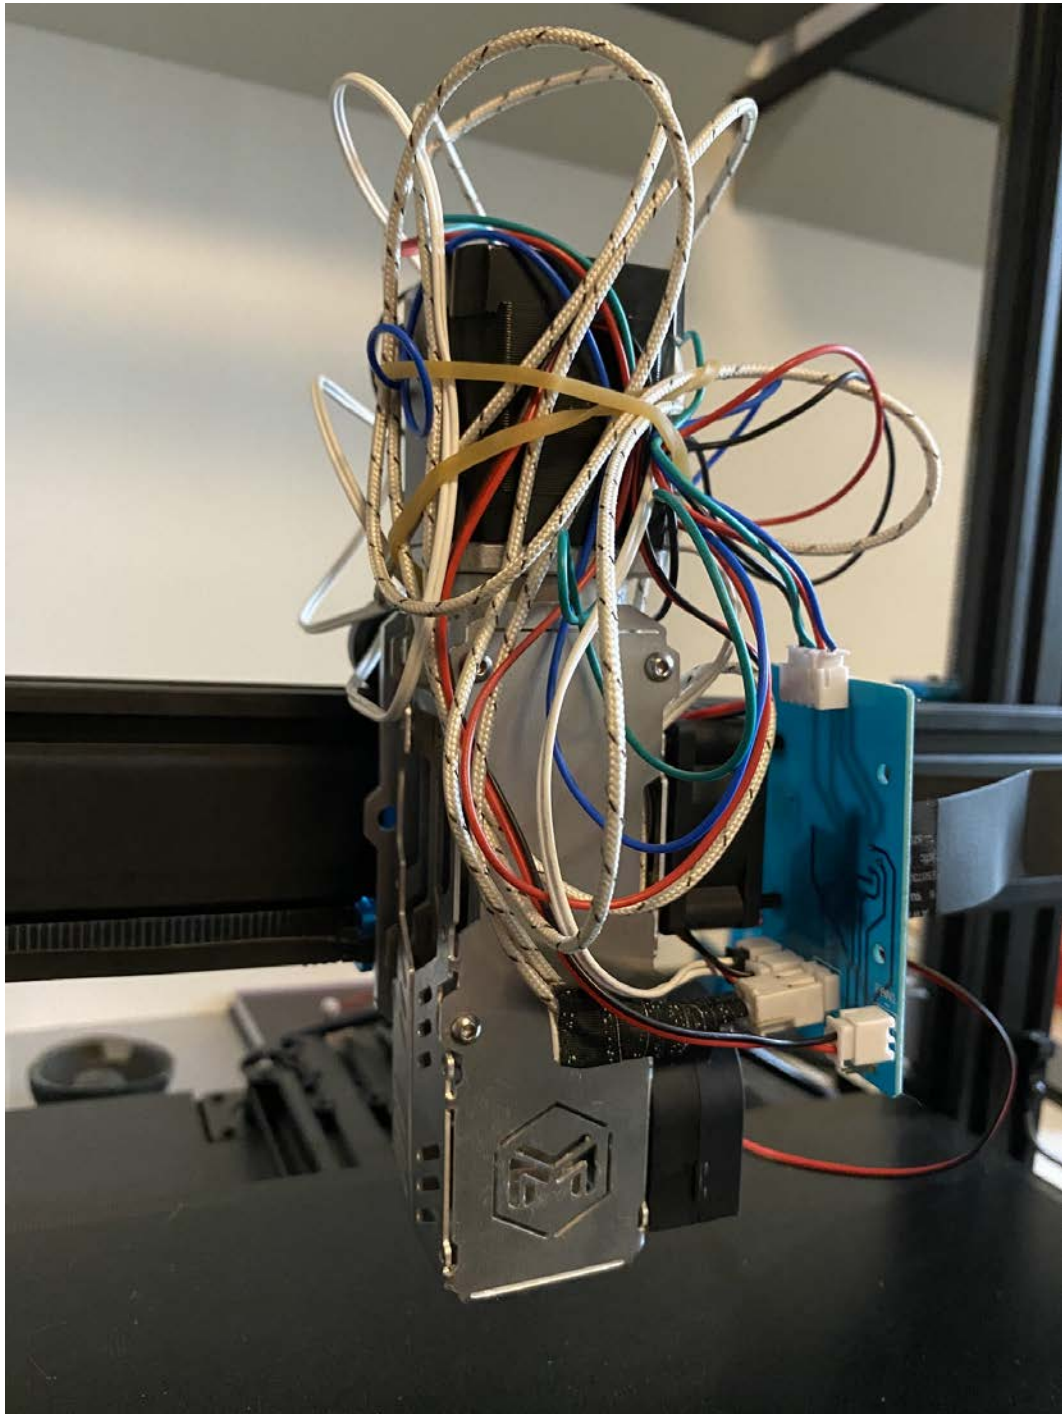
MahorXYZ Pellet Extruder on a Sidewinder X1 Printer
